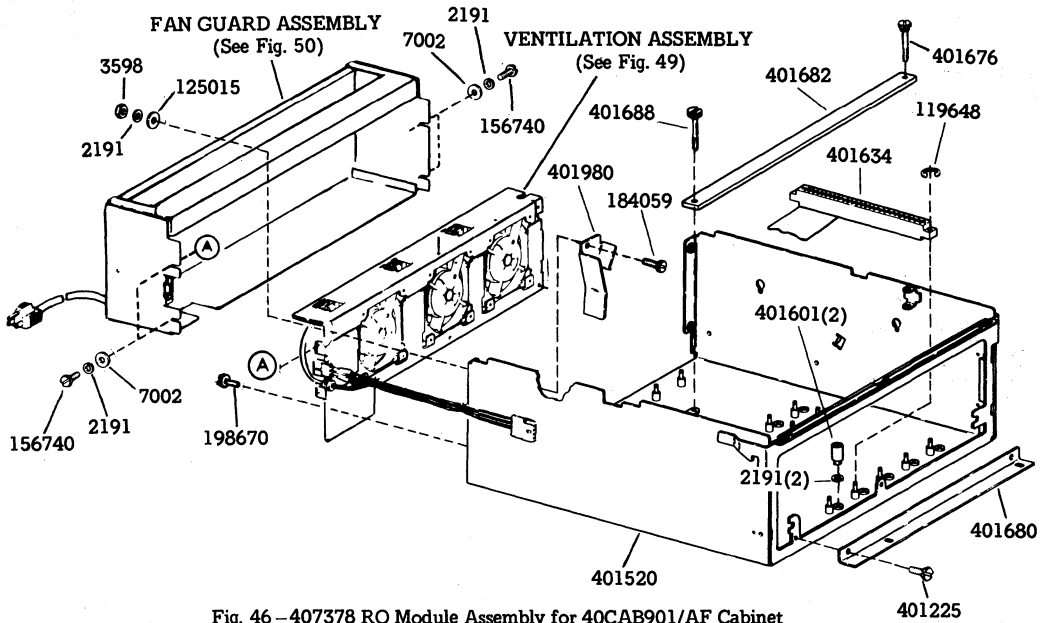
407378 RO Module Assembly for 40CAB901/AF Cabinet
